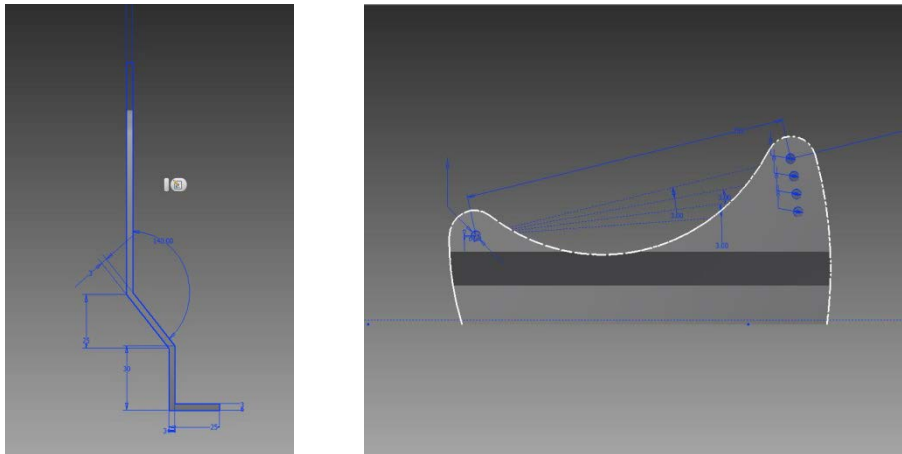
Bracket; profile extrusion, cut extrude shape and cut extrude for holes
